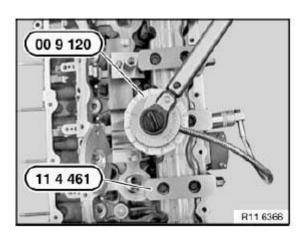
Tightening Lower And Upper Bearing Strips Using Special Tool (00 9 120) Courtesy of BMW OF NORTH AMERICA, INC.
